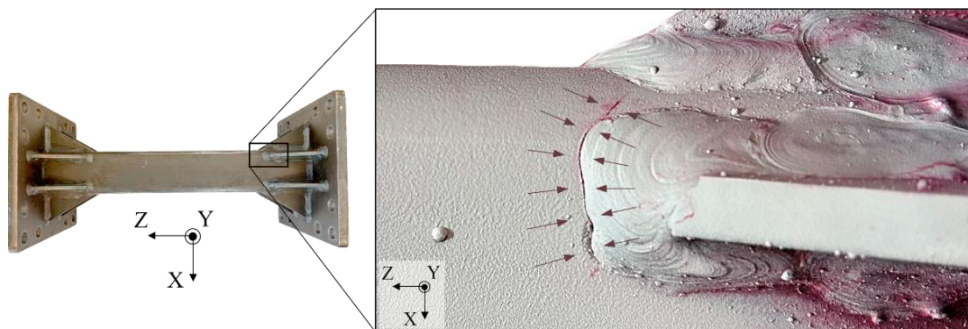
Fatigue crack path analysed by means of dye penetrant inspection: through-the-thickness fatigue crack initiated and propagated at the weld toe between the tube and a reinforcement rib in a specimen fatigue tested under out-of-phase ($\varphi = 90^\circ$) bending-torsion constant amplitude loading.
